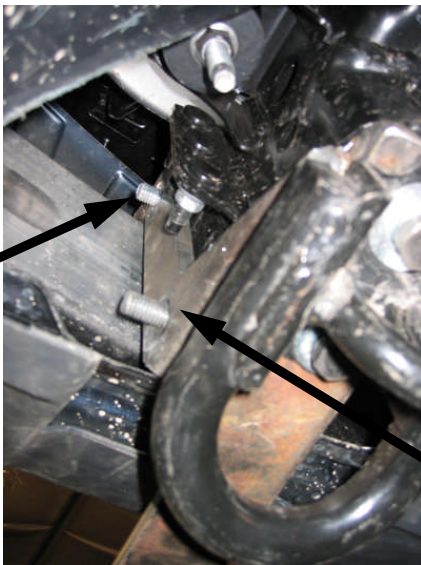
Shows stiffener bolt plate "bolts" protruding through the holes of the Top Bracket, see Fig 8 for details.
